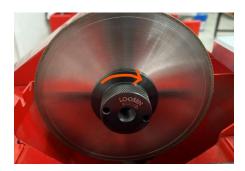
Loosening direction. Hold wheel with left hand and loosen knob towards table with right hand.
